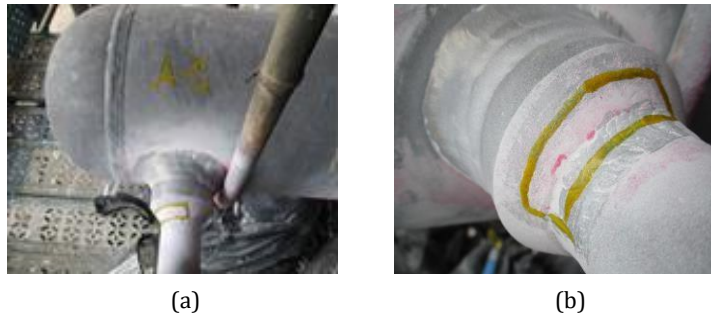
Hot collector weldolet of joint A, (a) general views and (b) showing linear circumferential crack of 10 mm.
